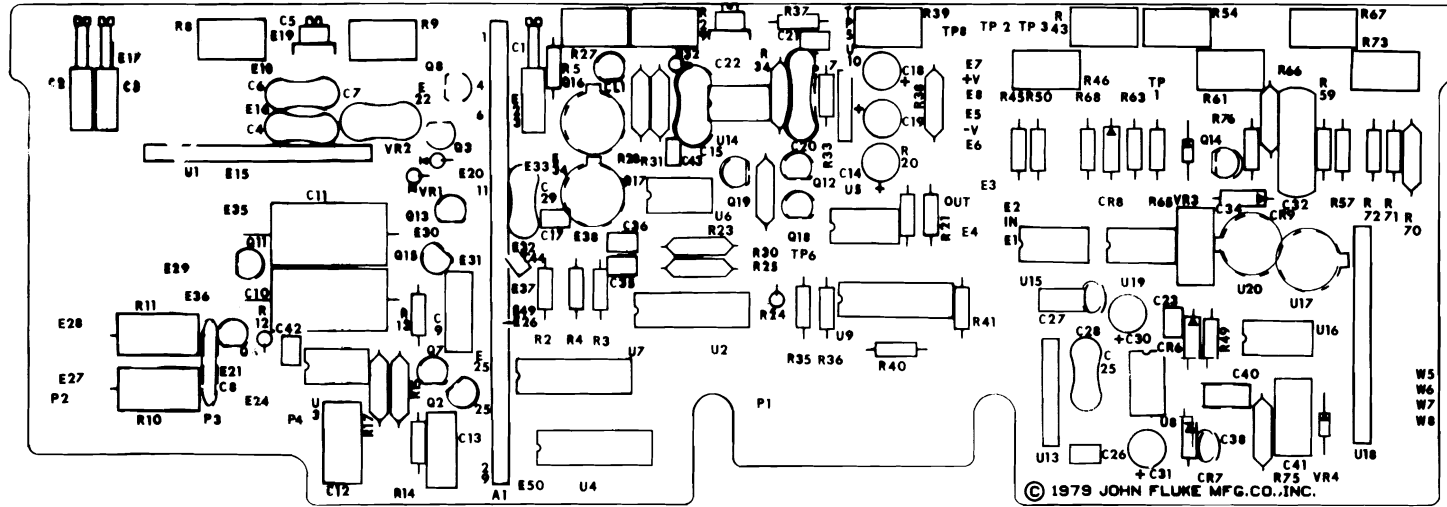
A4 AC/DC Scaling PCB Assembly
